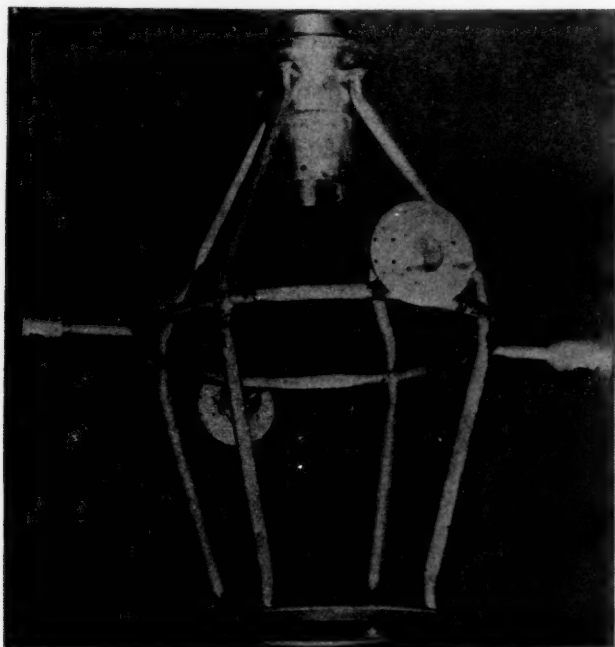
The internal reinforcing structure of the satellite is made by Brooks & Perkins, Inc. of magnesium tubing and parts machined from magnesium bar stock. All parts of this structure are assembled by welding, using the inert gas-shielded arc welding method
